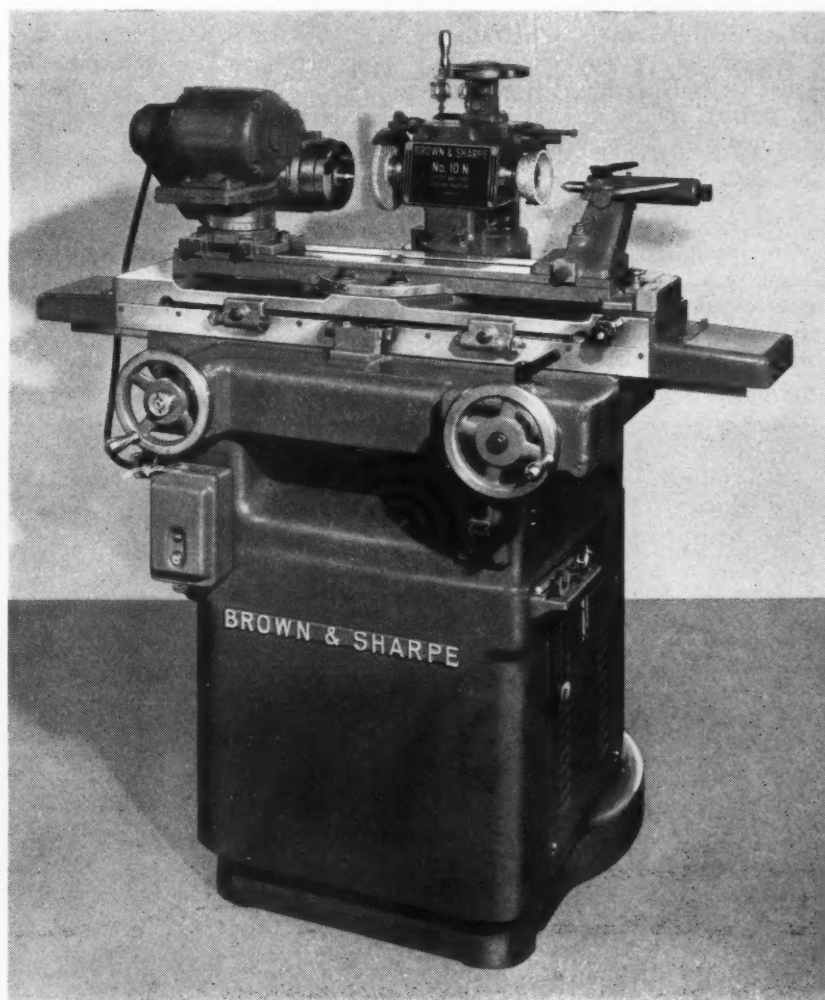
B & S cutter and tool grinding machine with universal equipment
